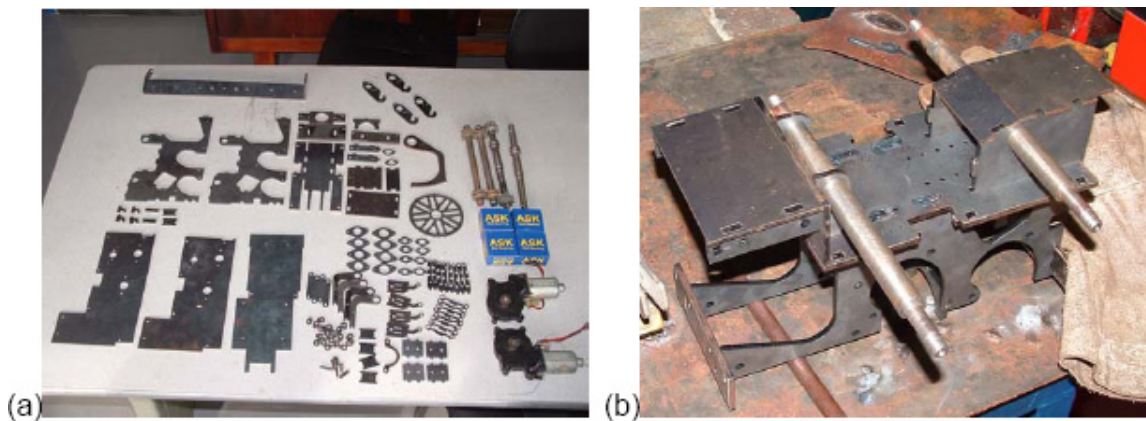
(a) LASER cut parts (b) Assemble of the structure
